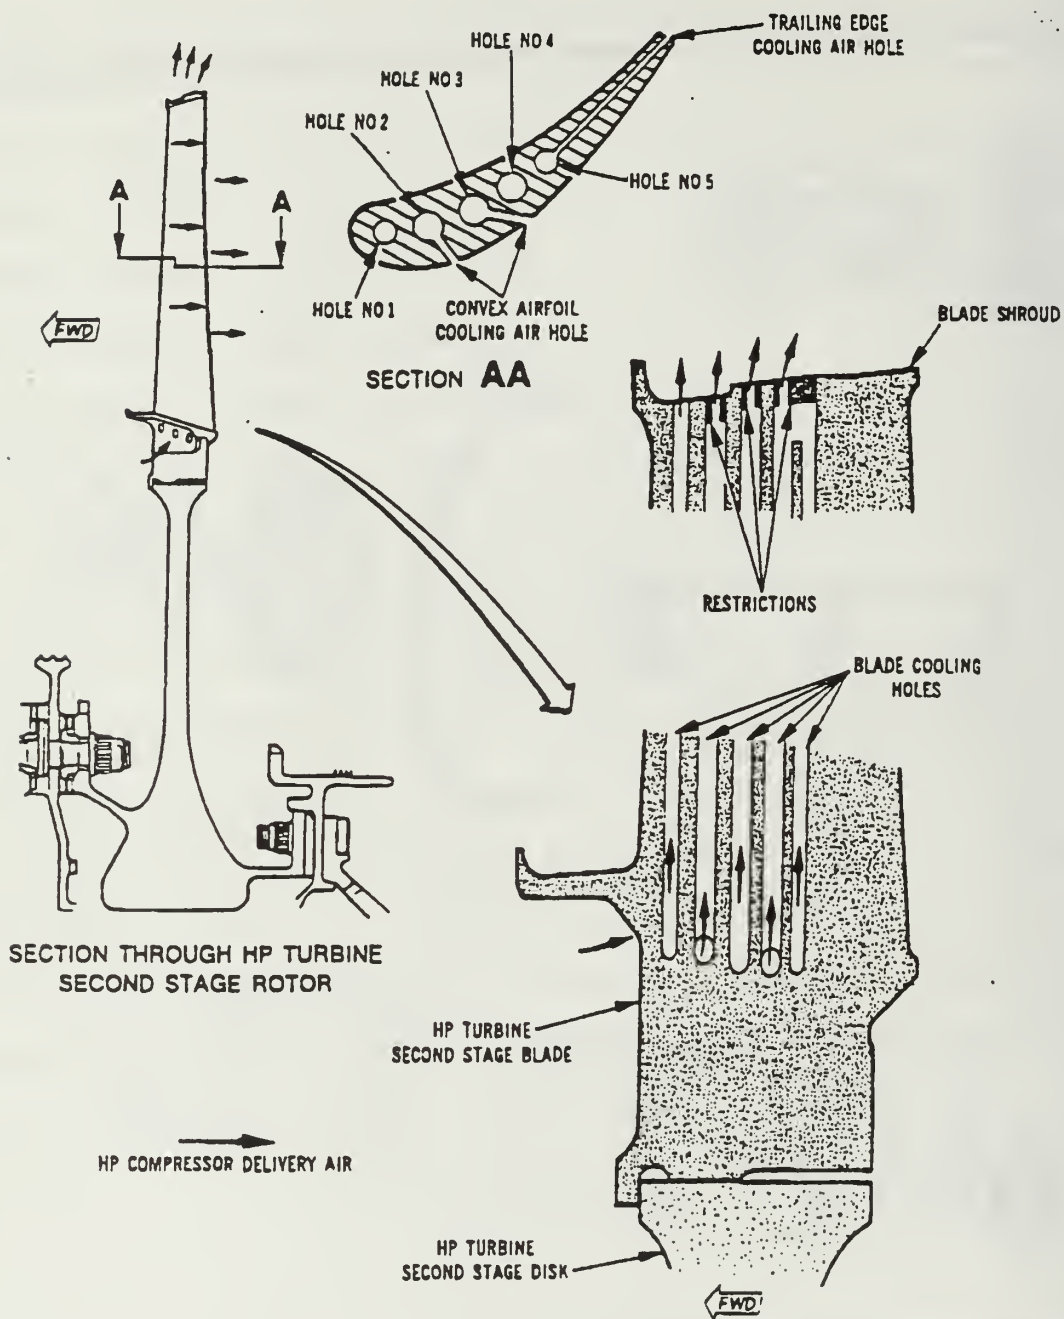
Details of High Pressure Turbine, Second Stage Blades
